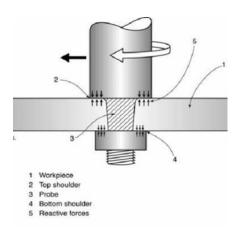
Bobbin Tool Friction Stir Welding
